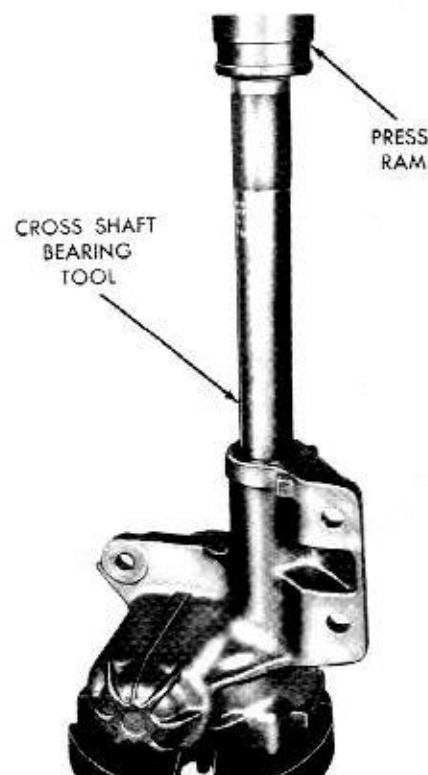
Removing Cross Shaft Inner and Outer Bearings
